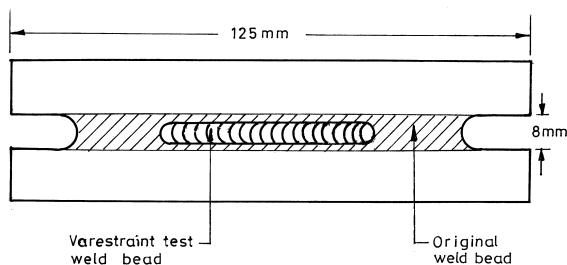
Specimen with weld bead for Varestraint testing.
